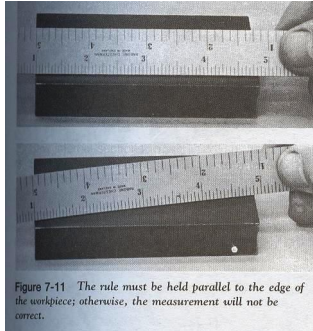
The rule must be held parallel to the edge of the workpiece; otherwise, the measurement will not be correct.
